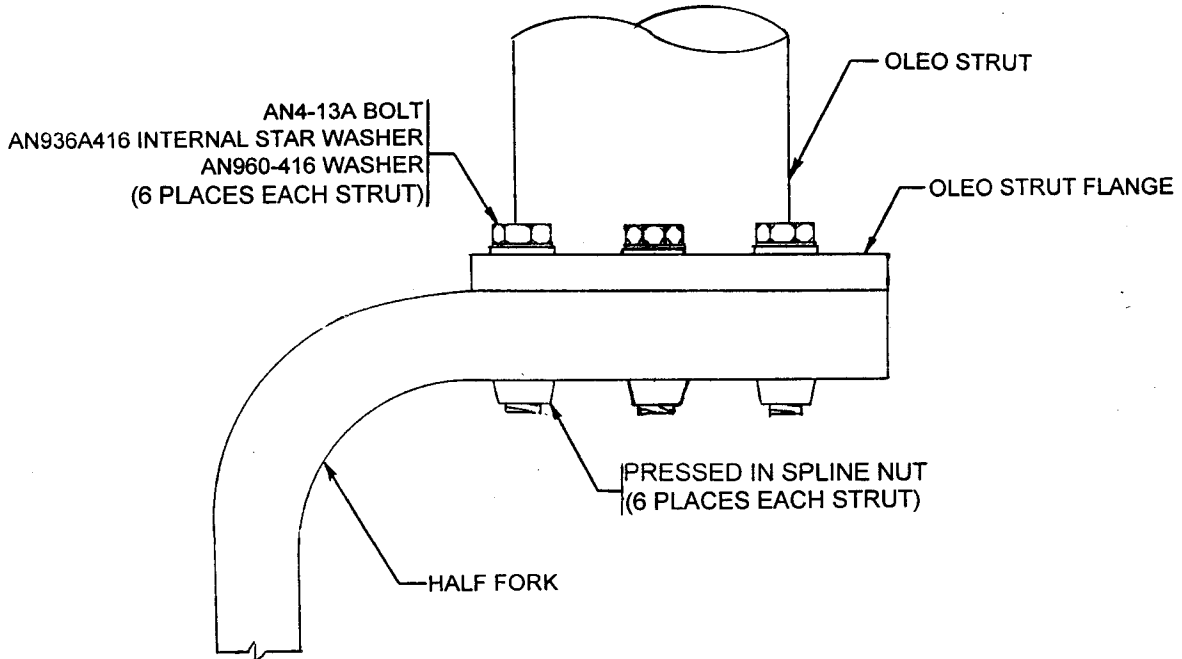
Main Gear Half Fork/Oleo Strut Assembly
